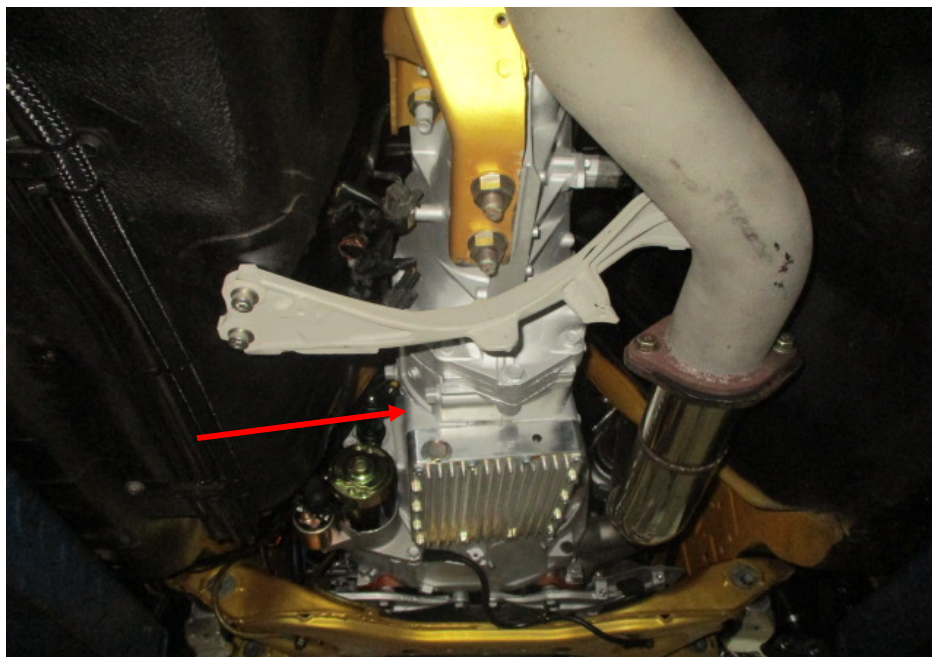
shows a general view of the transmission (arrowed) that was fitted on the Motor Car, as viewed from the rear to front perspective of the Motor Car. Overall, I had found the transmission of the Motor Car to be secured properly. The fitting of the manual transmission system, as at the time of my inspection, did not compromise the structural integrity of the Motor Car.
